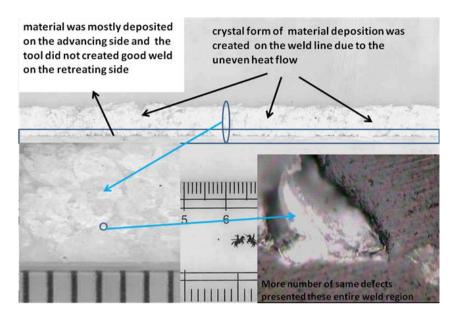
Crystal form of Material Deposition and Defective Welding on Retreating Side
